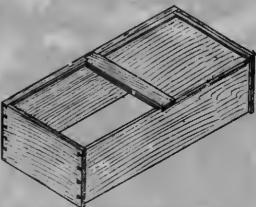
Wardrobe Drawer, Bottom Upwards.
